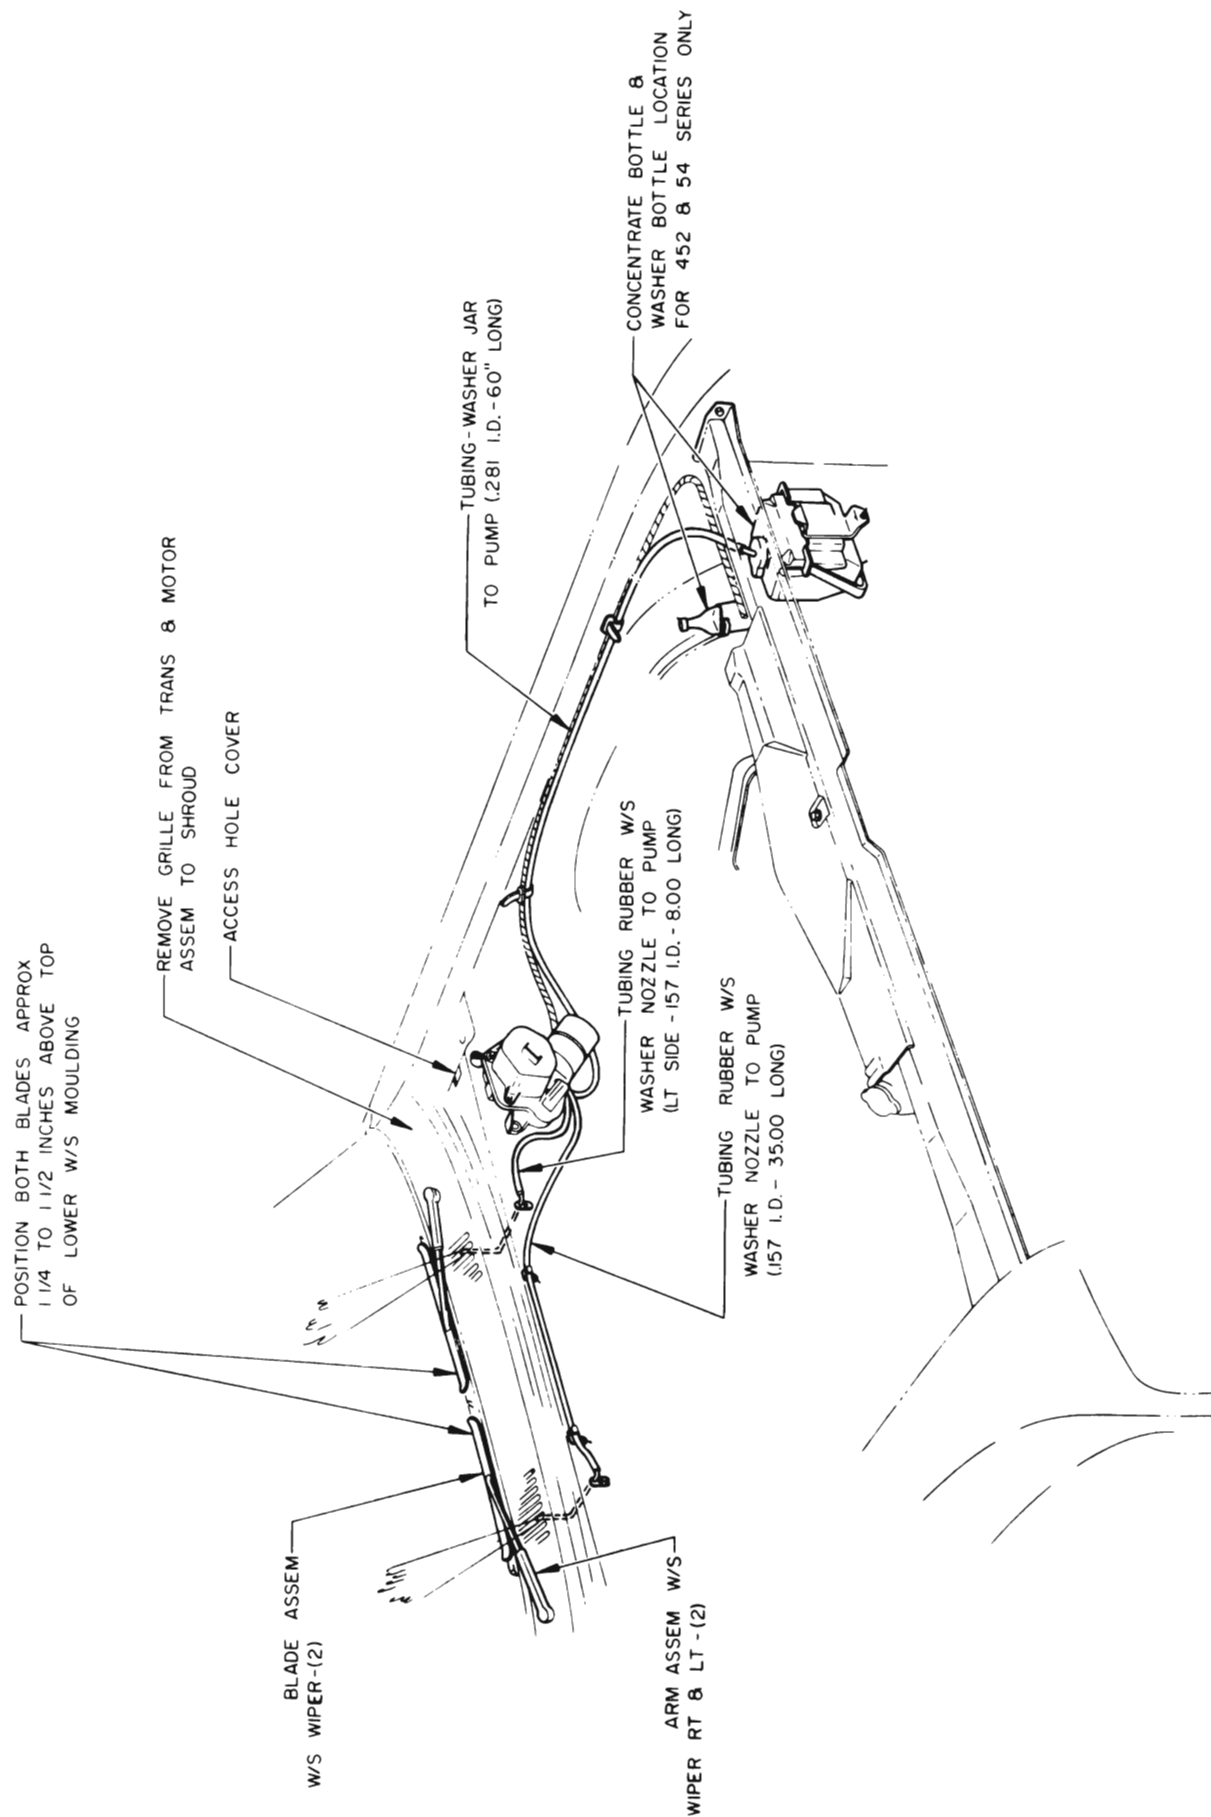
Wiper Arm Installation - Single Speed Wiper
